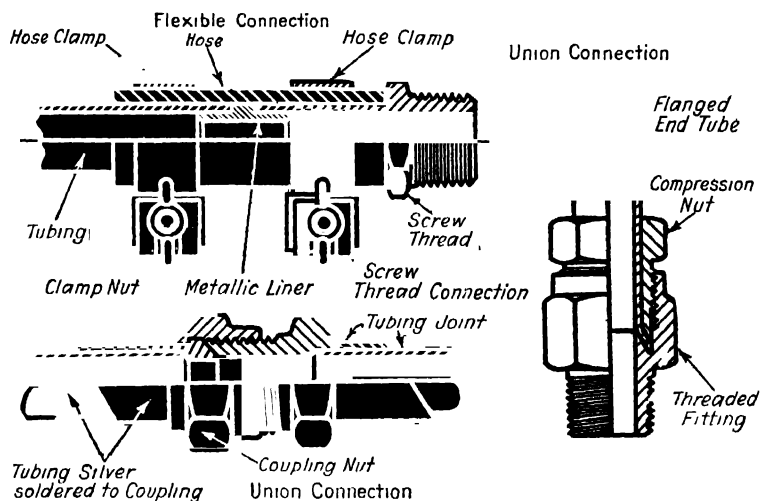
Various Types of Fuel Pipe Connections Used in Powerplant Installation.
